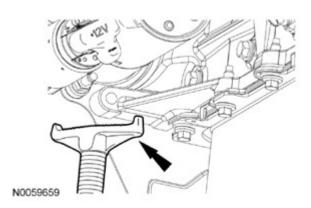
Raising Engine Using Jack Courtesy of FORD MOTOR CO.
